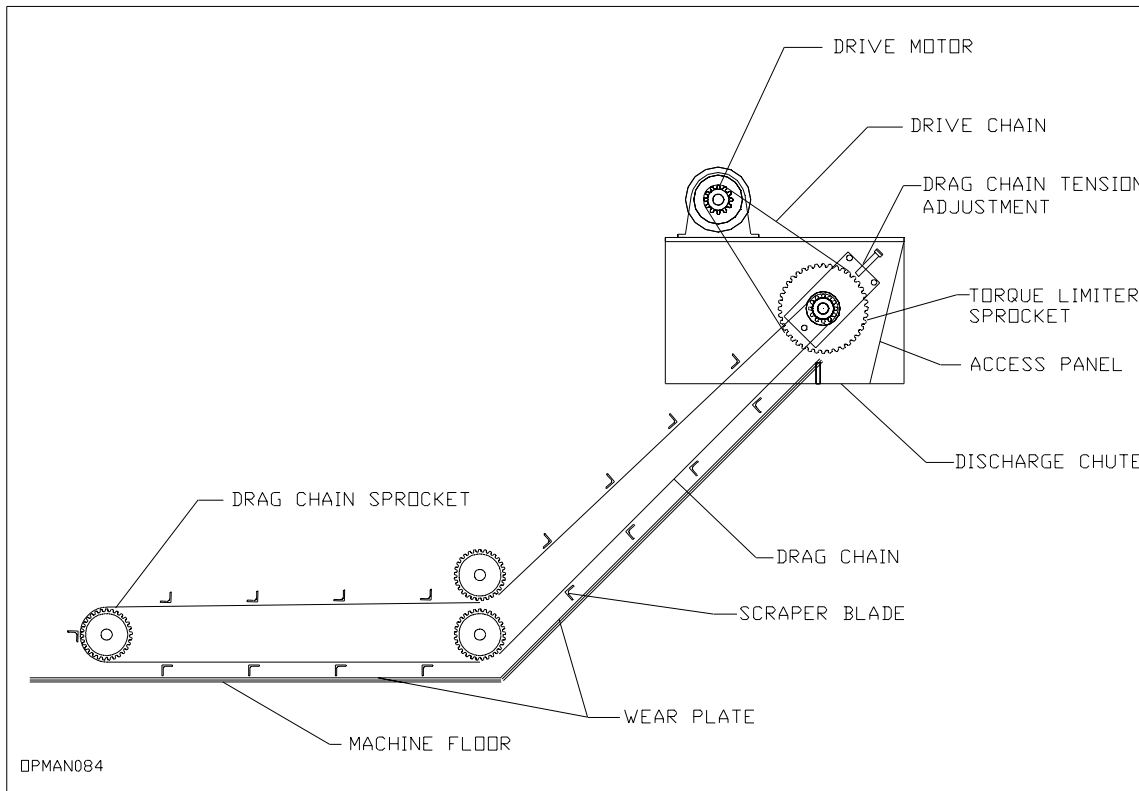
40: Sludge Scraper -- Diagram of Parts
